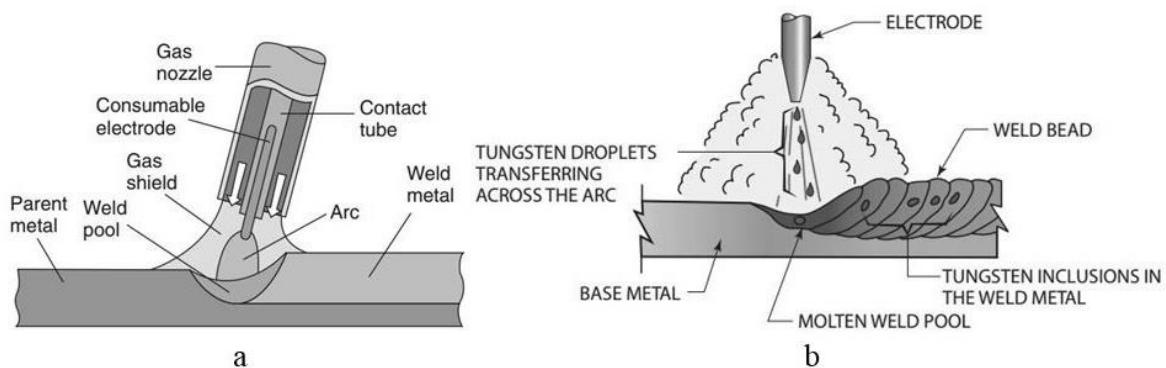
Welding methods: a – GMAW process; b – GTAW process
